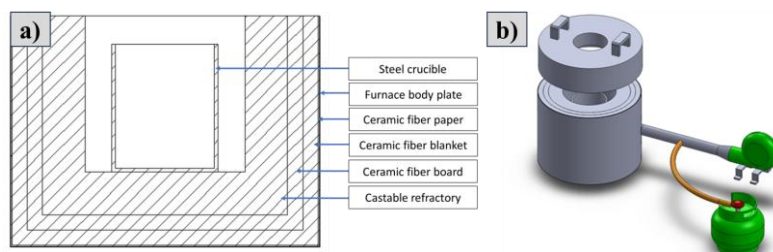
Furnace design: a) details of the insulation layer and b) furnace assembly
